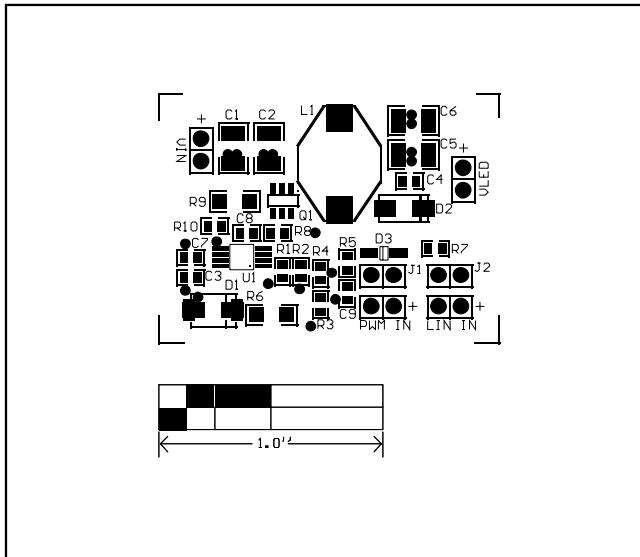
MAX16802B EV Kit Component Placement Guide—Component Side
